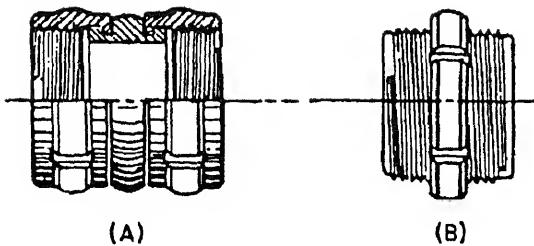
(A) Double female coupling; (B) double male fitting.
